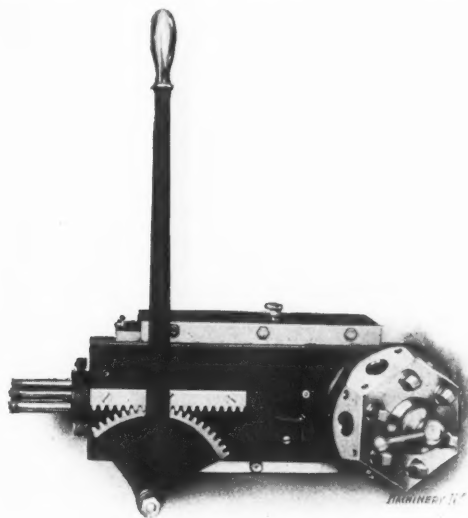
Lever Feed of No. 1 Tilted Turret Screw Machine
